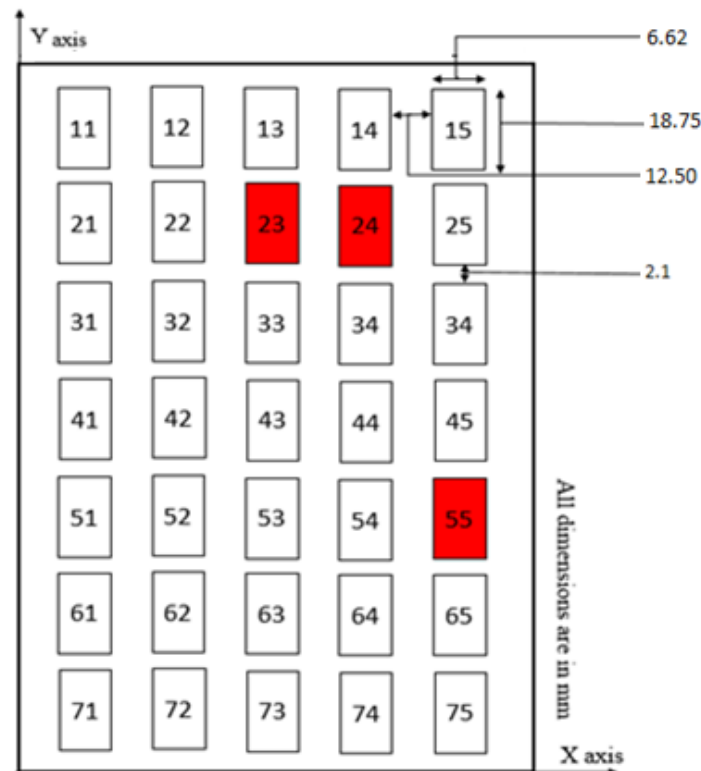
PCB dimensions showing 35 locations for nine heat sources
